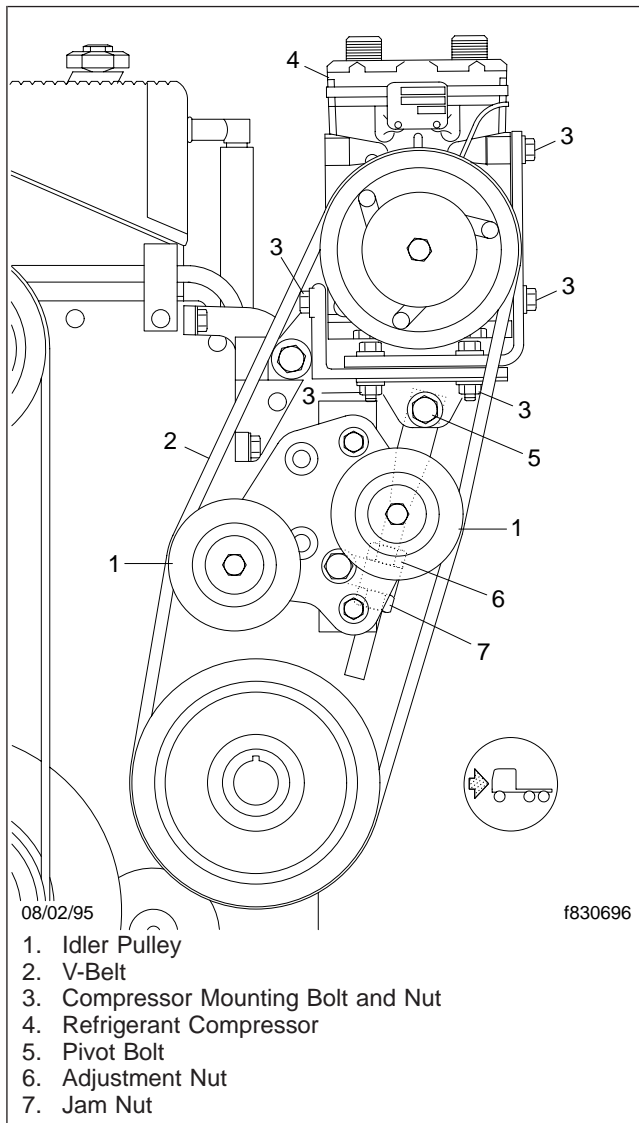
, Compressor Mounted on a Cummins ISM/M11 Engine
